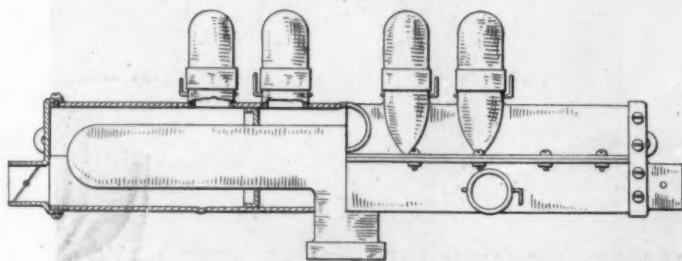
SPECIAL JACKETED MANIFOLD EMPLOYED BY THE BUREAU OF STANDARDS TO STUDY MIXTURE CONDITIONS AND MANIFOLD HEATING
